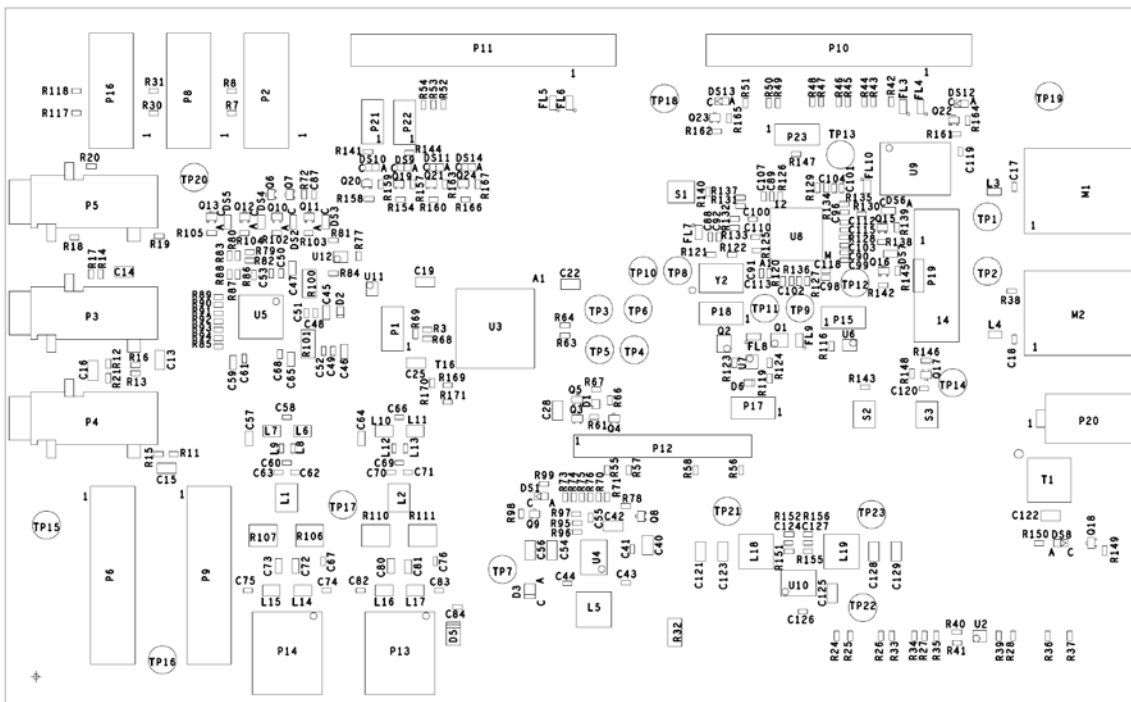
EVAL-ADAU1472Z PCB Assembly Drawing (Top Side)
